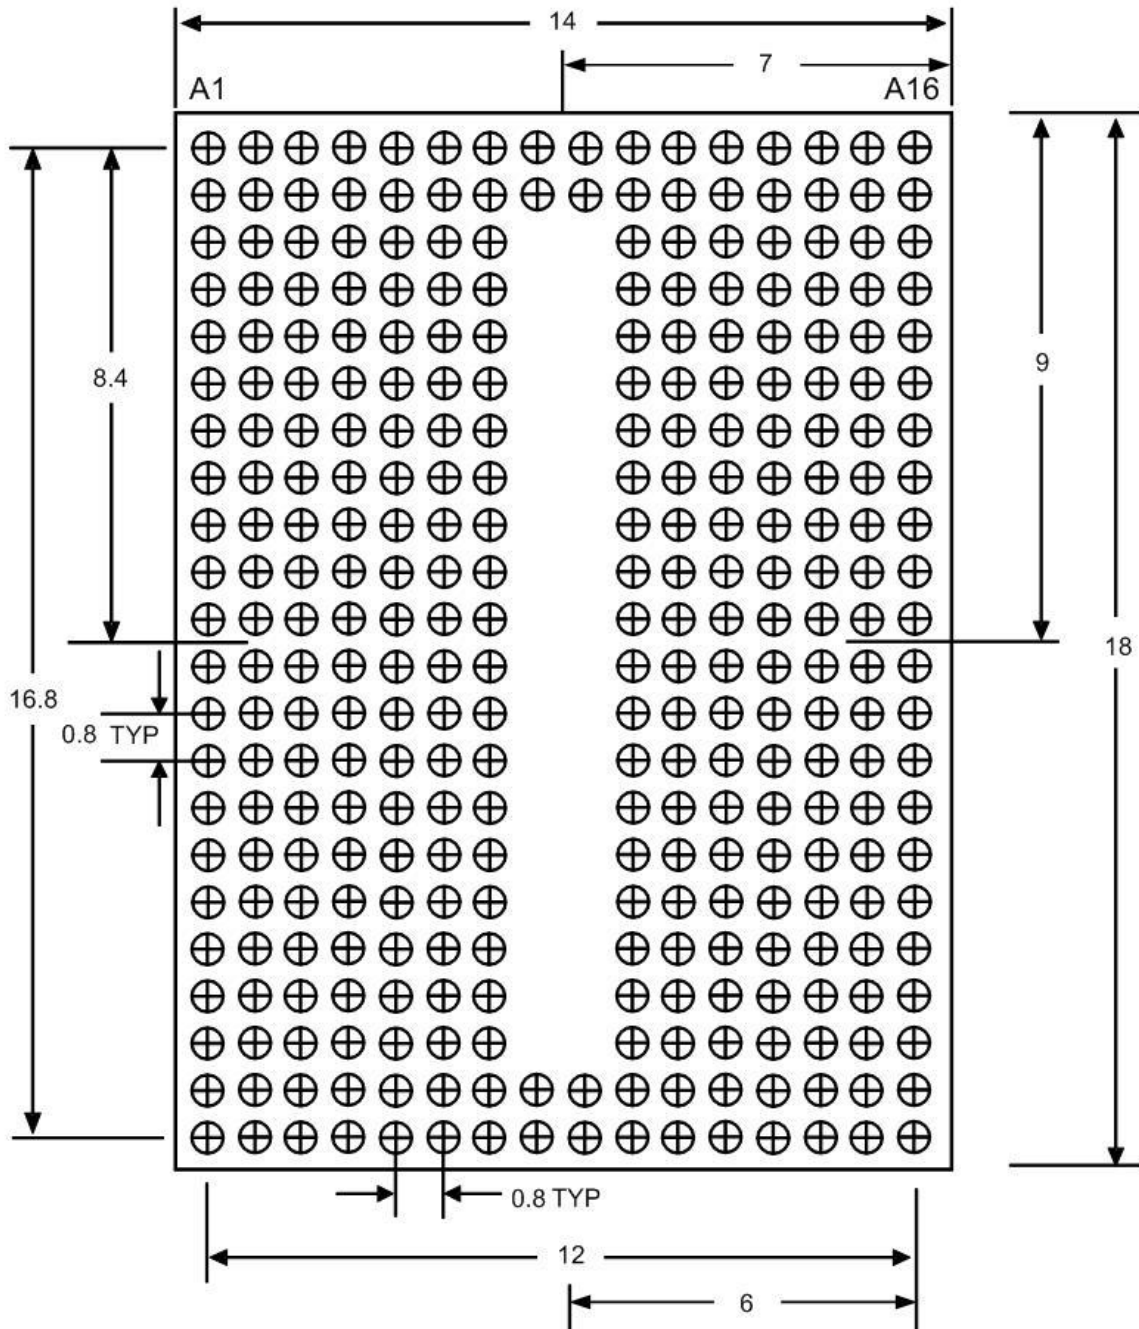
BGA-316 ball spacing requirements (top view, dimensions in millimeters)
